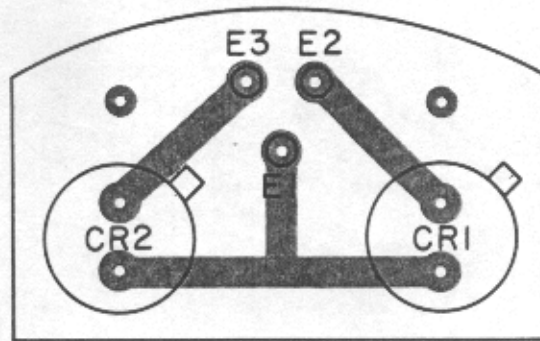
Part 17543 Optical Transmitter (A25A1), Location of Components
